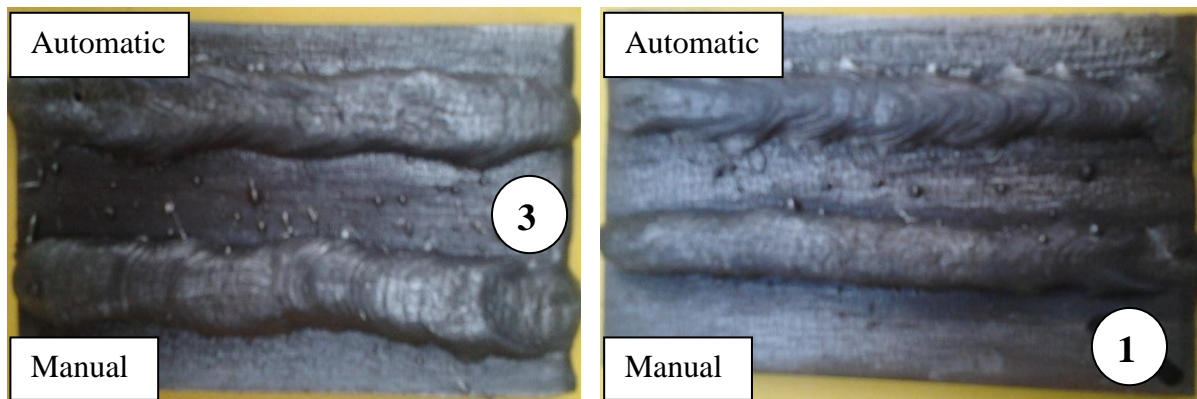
depict clearly that the welding result of automatic GMAW setup are very fine and have good weld bead appearance. From the results it can be concluded that the spatters get disappear with the use of automatic welding setup because there is a constant gap between nozzle and work during welding as shown in the figure 3.12. Sample no. 1 shows the bead with consistent uniform ripples and a uniform bead width and height produced by automatic welding setup. The weld bead is exactly uniform in a straight line by automatic setup than manual one. The metal deposition rate is uniform in sample no. 2 of AISI 304 by automatic welding. Specimen no. 3 ranked highest in having the least amount of spatters. It can be concluded by seeing this sample that the bead weaving zig-zag with manual welding which gives poor appearance.
